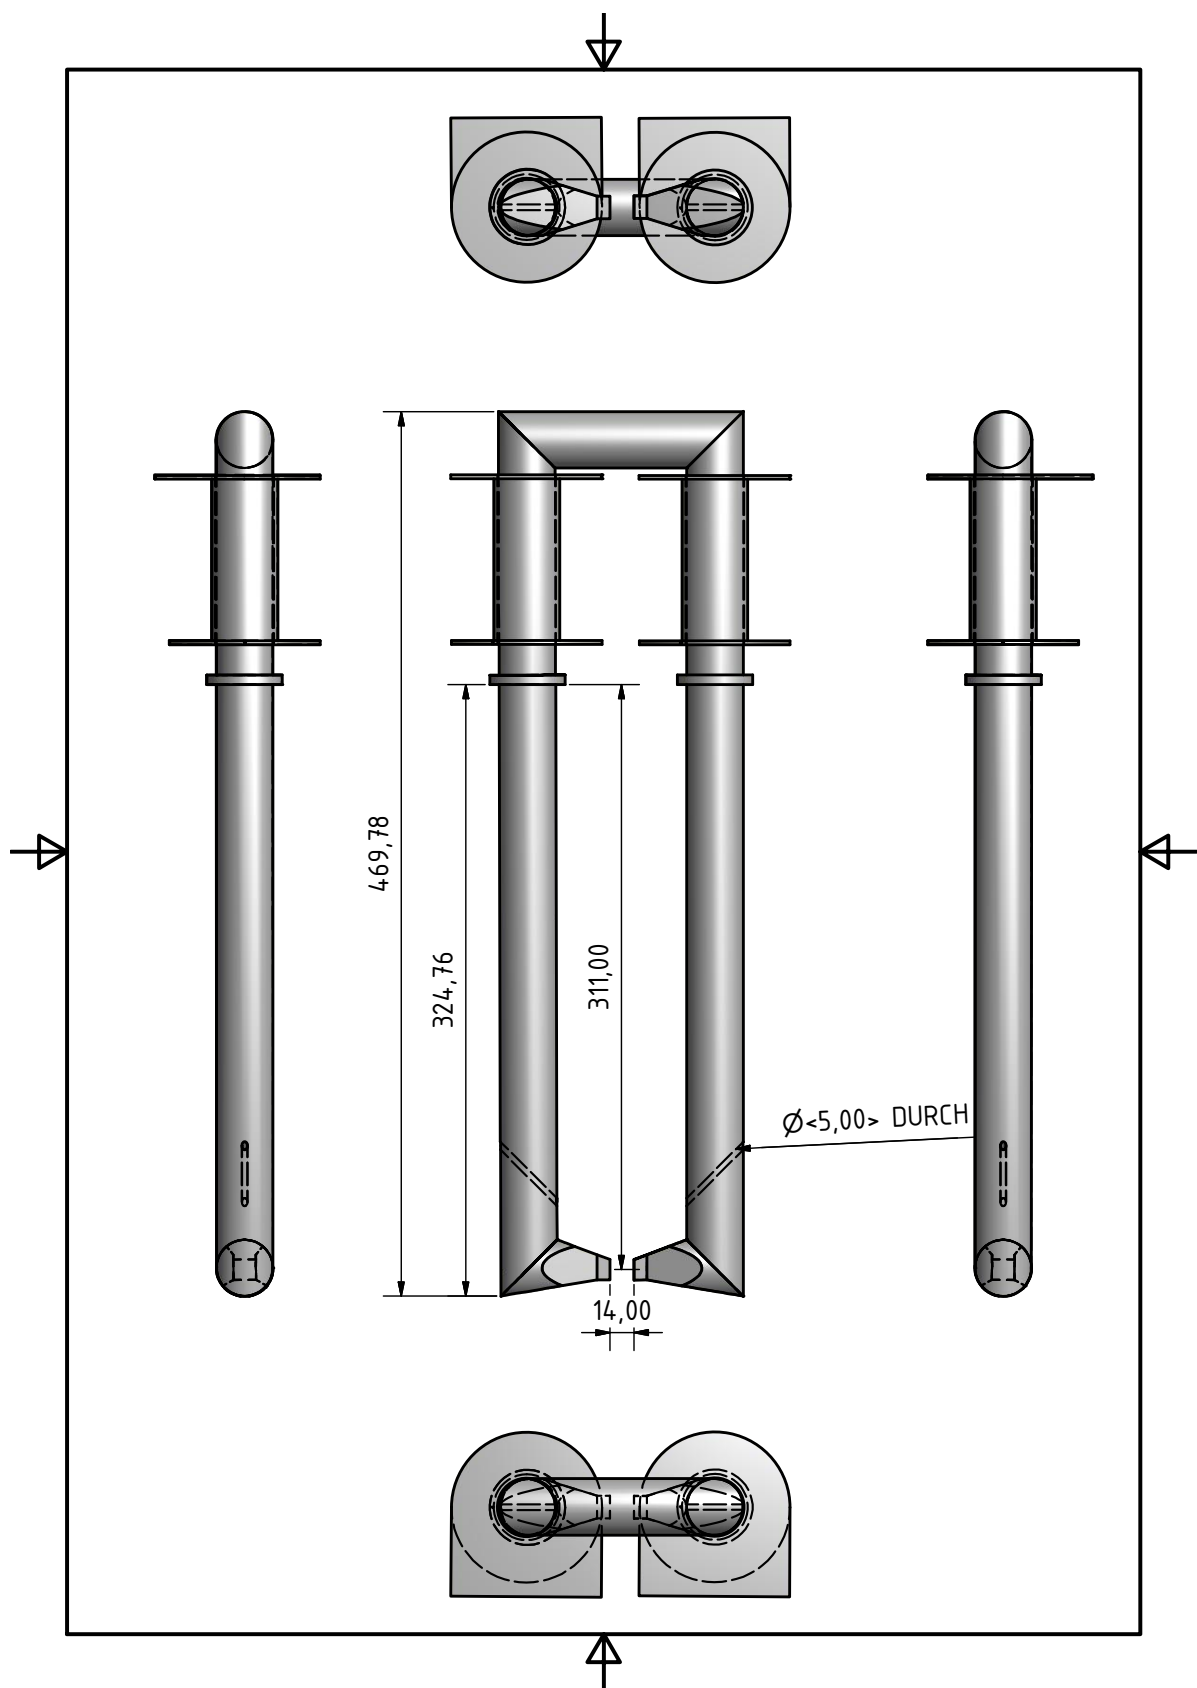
CAD sketch of the yoke of electromagnet assembly composed of two legs, two pole shoes, connection part and coil winding former. The displayed configuration results in a sample holder slot of 14 mm. The this way assembled magnet is mounted to the preparation chamber of the LT-STM system.
